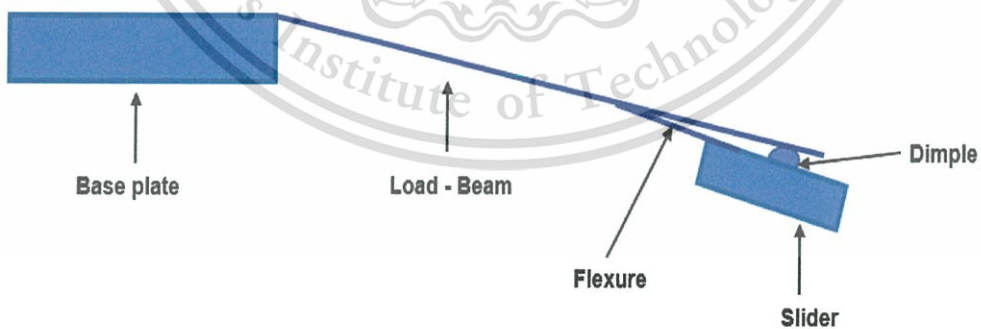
The image of Head Gimbal Assembly and Dimple position
